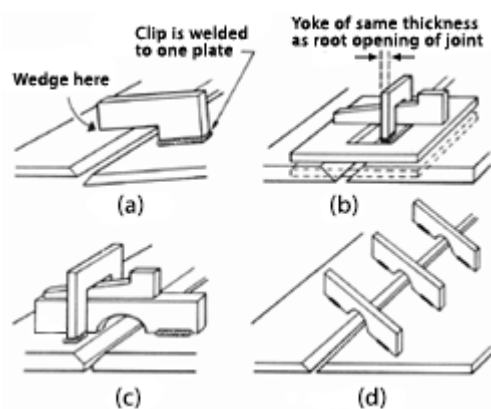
Various strong back arrangements to control distortion during butt-welding.
